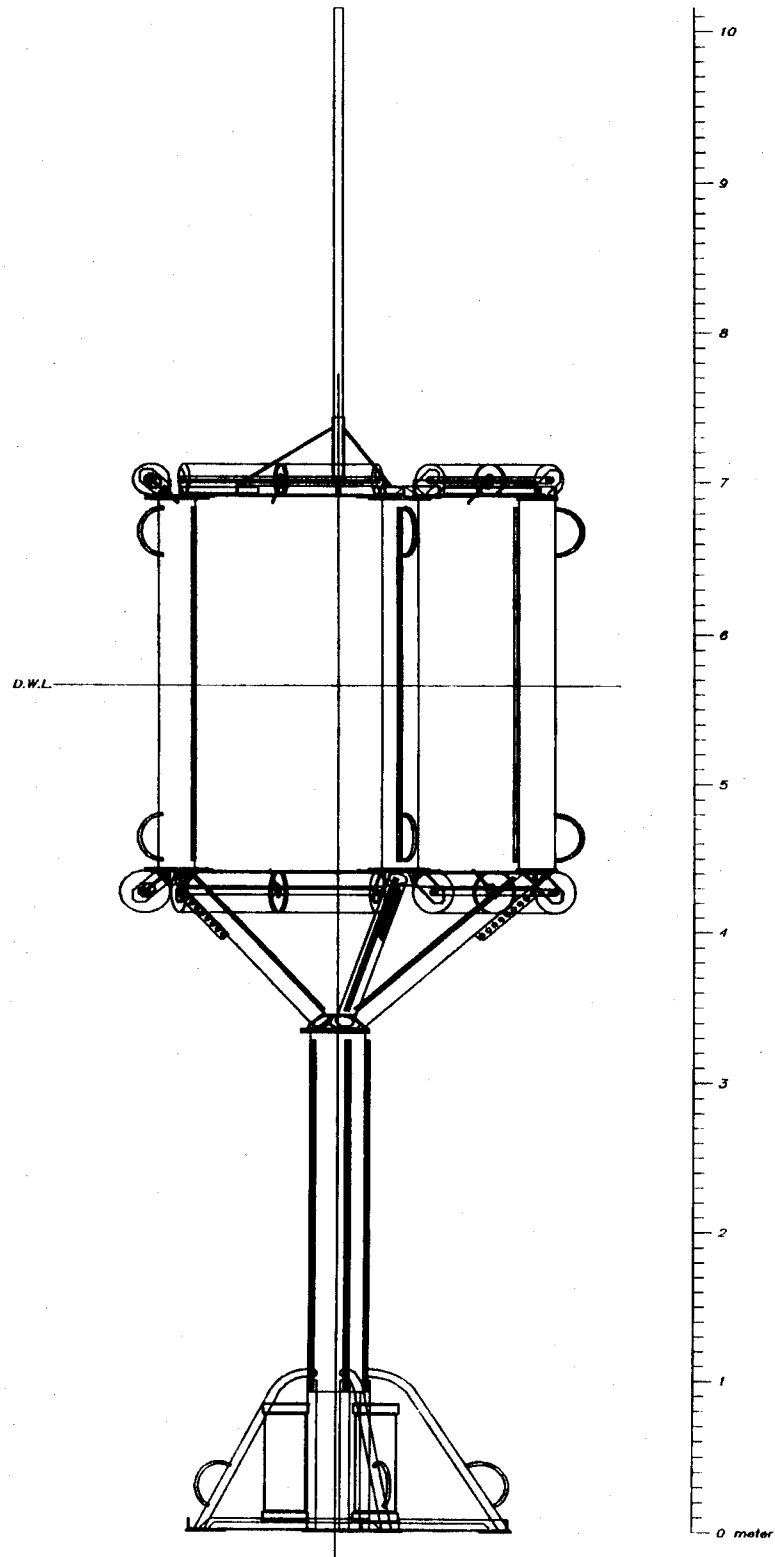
Engineering drawing of prototype MultiSpar buoy.
